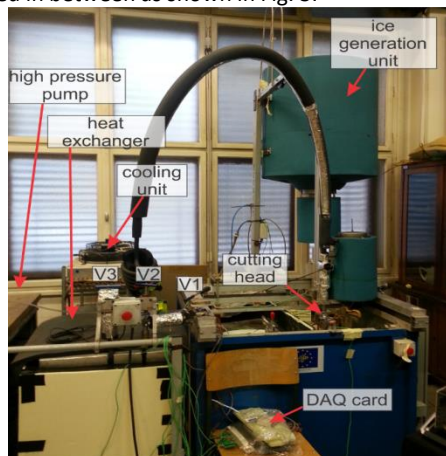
The experimental setup, showing the major components of the IAWJ prototype.
